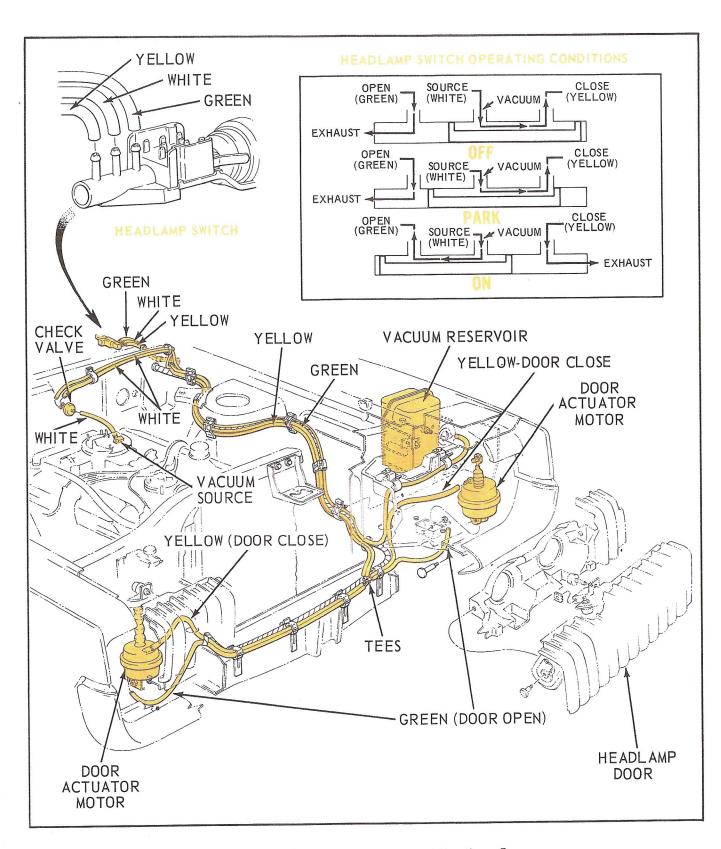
1968 Cougar Vacuum Operated Headlamp Doors
